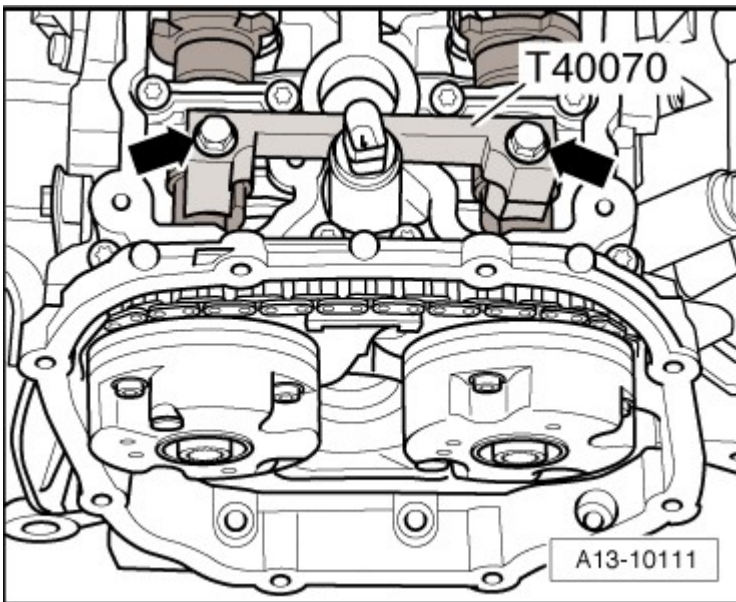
Mounting Camshaft Locating Tool T40070 To Both Cylinder Heads And Tightening Bolts
